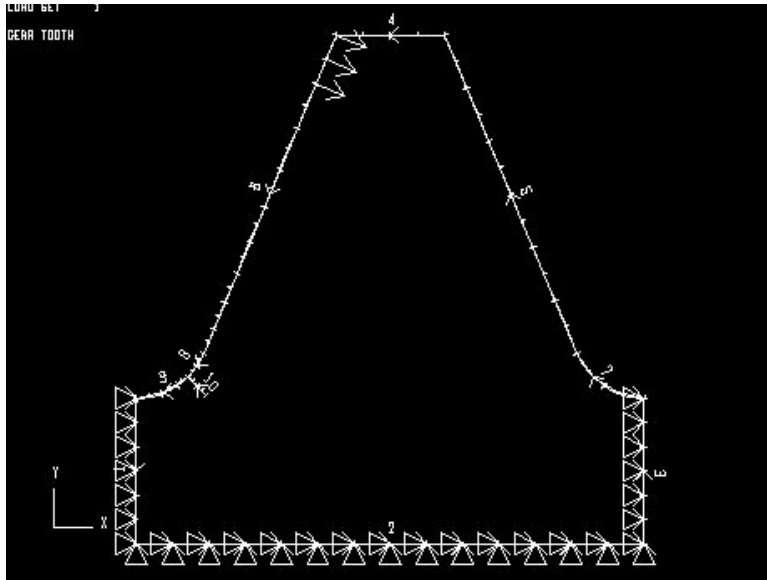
Complete model geometry of the gear tooth with the applied loading.
